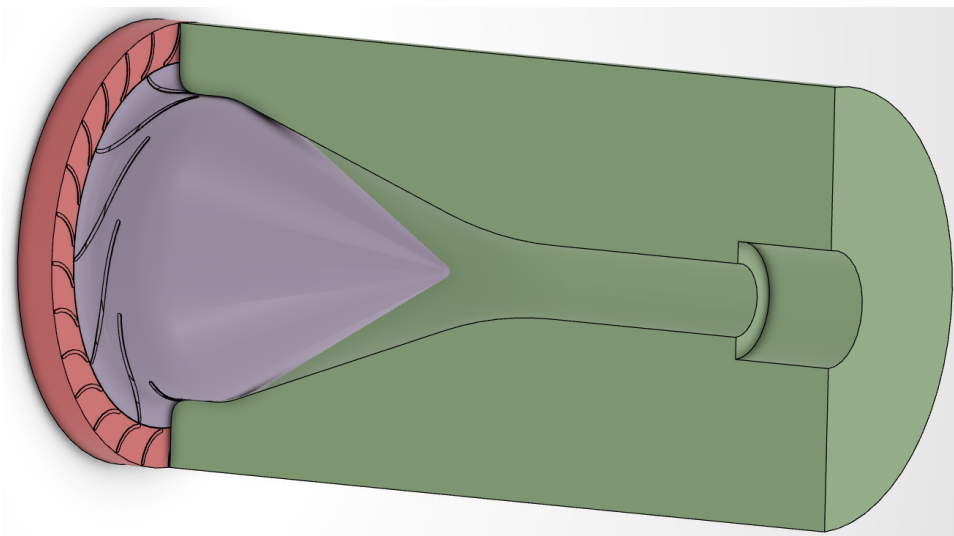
A 3D CAD model of the turbine design. Featuring a stator (red), the rotor (purple) and a shroud (green) with an integrated diffuser diverging at 10° to the specified outlet pipe diameter
